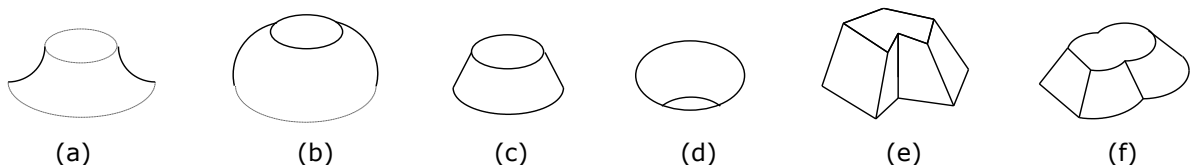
New six SFs: (a) Concave flange, (b) Convex flange, (c) Taper, (d) Tapered hole, (e) Tapered polygonal extrusion, and (f) Tapered multiple extrusion.
